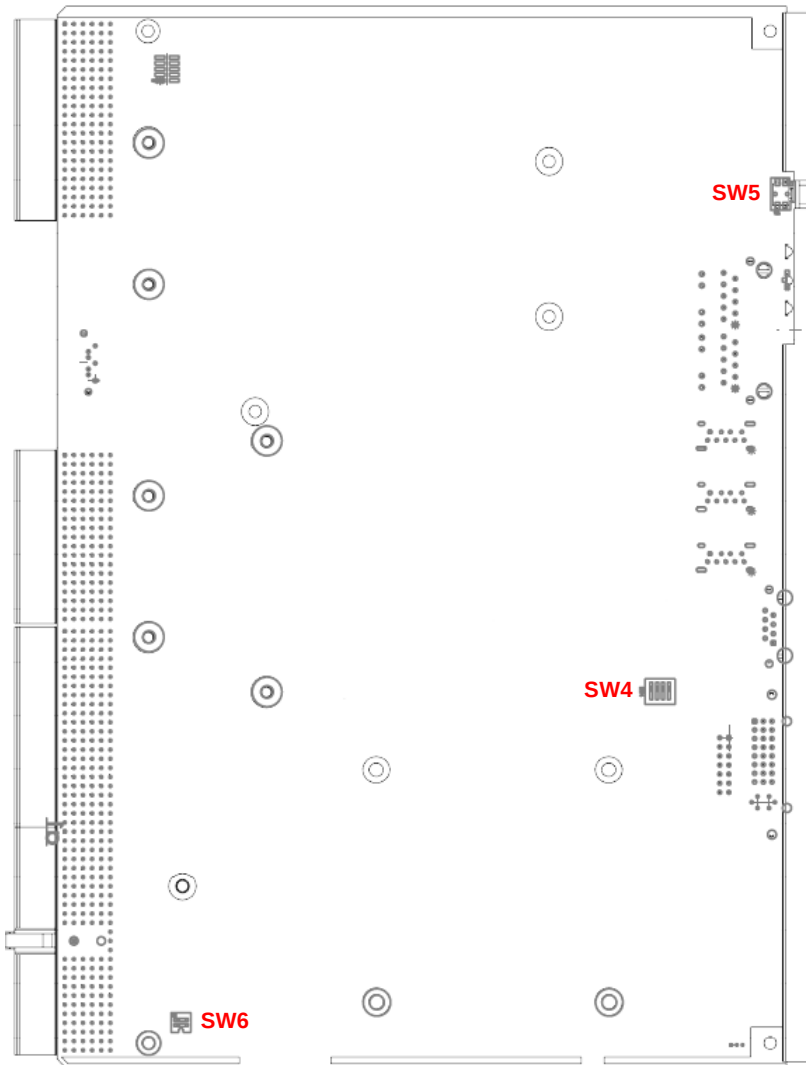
cPCI-6636 Series Switch Locations - Solder Side
